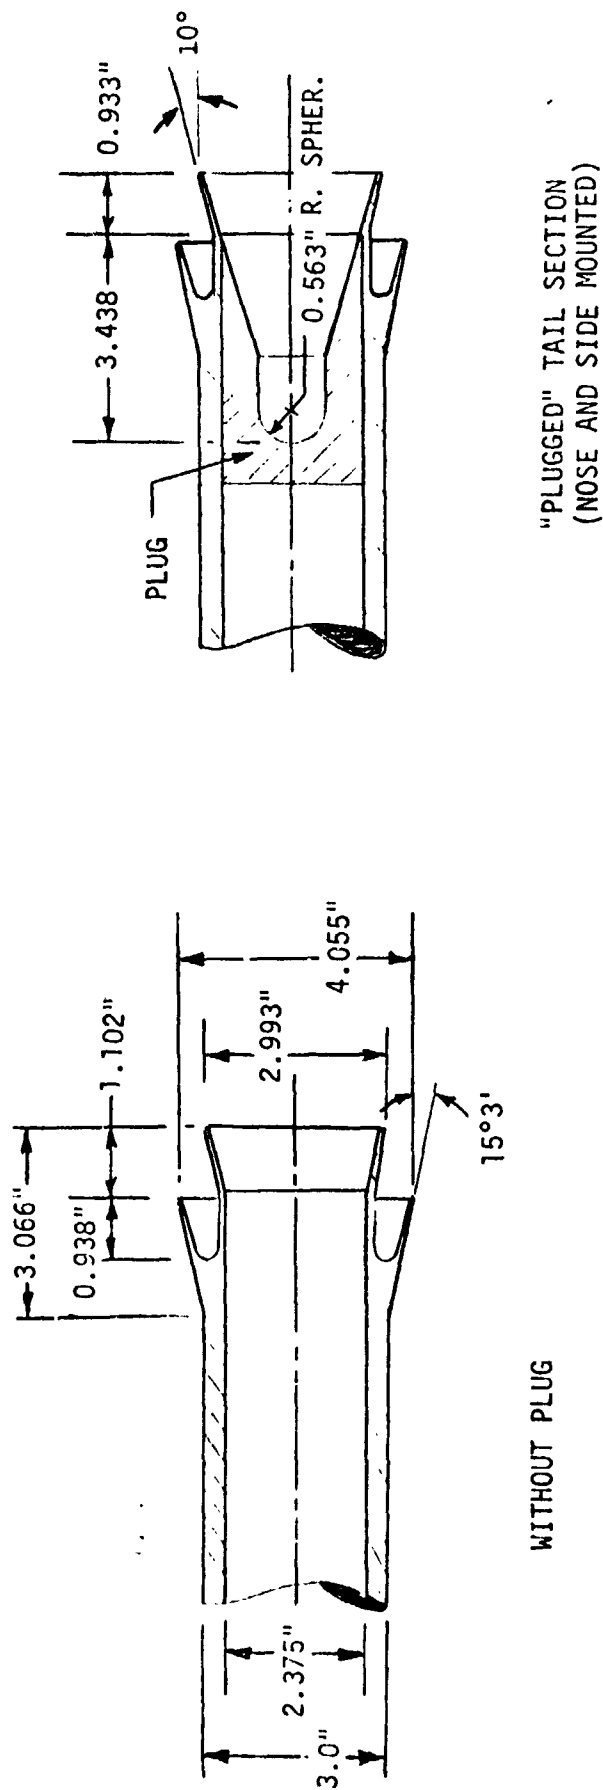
DETAILS OF SRB MODEL TAIL SECTION
